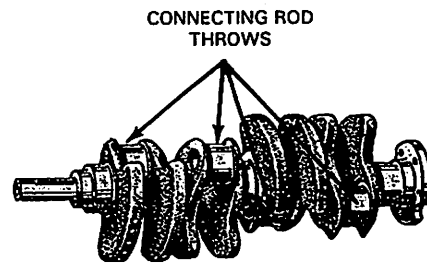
F. A typical V-8 engine crankshaft has same arrangement of connecting rod throws as shown in Fig. 2-61B. (Ford)
